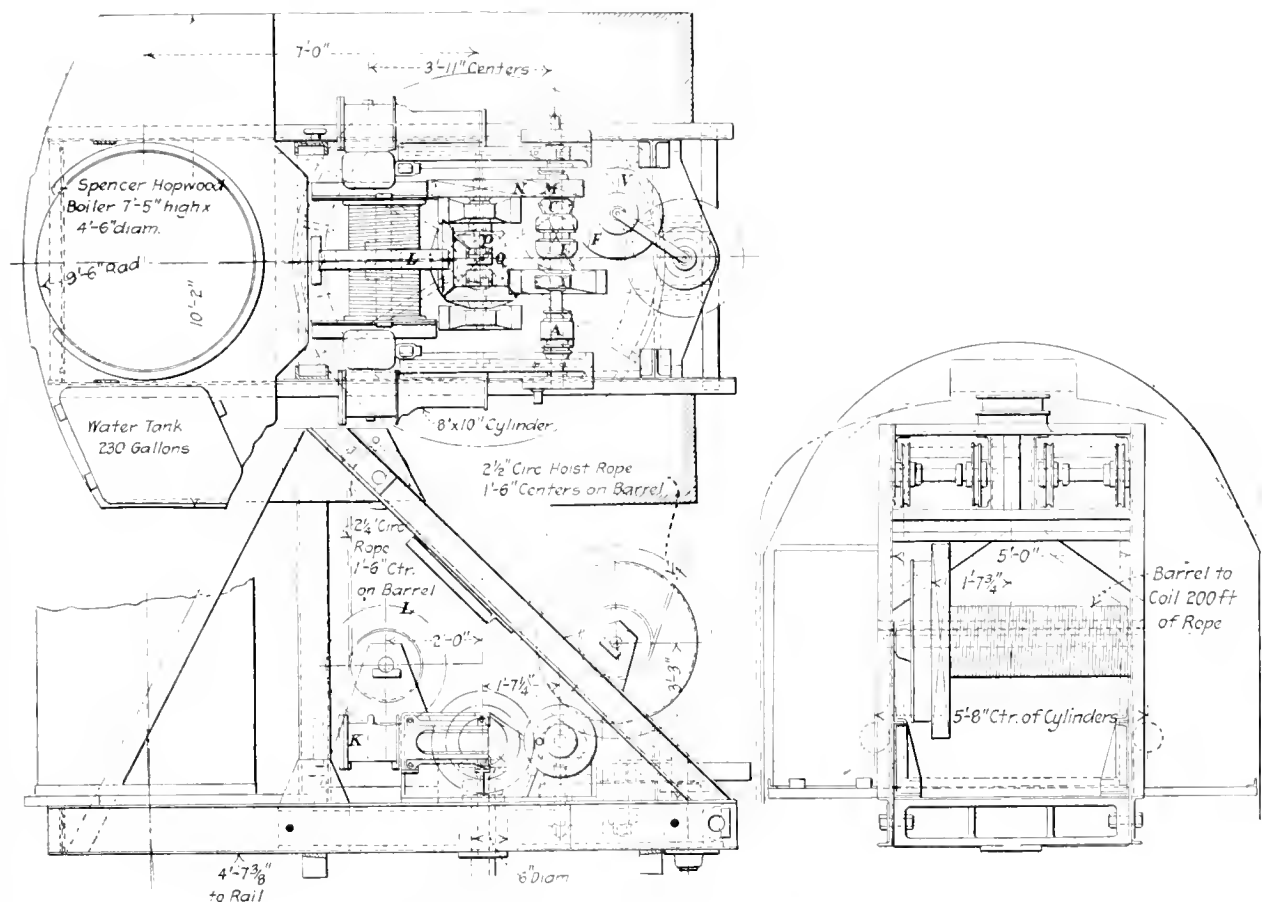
ARRANGEMENT OF GEAR OF THE CRANE SHOWN IN FIG. 5
